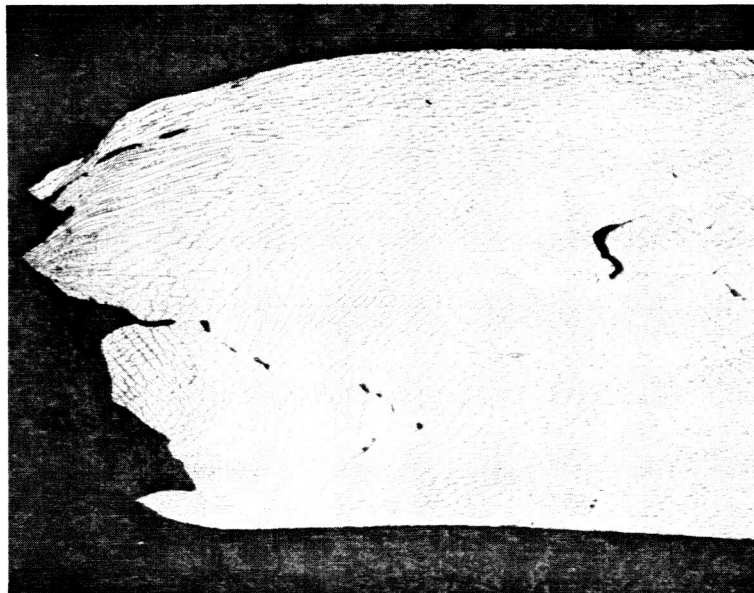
T-111 Elevated Temperature Transverse Weld Tensile Fractures
